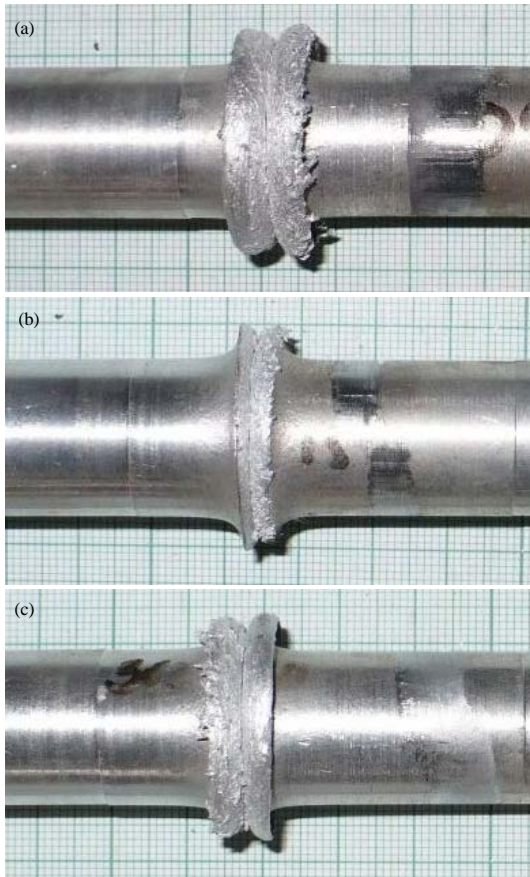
Representative photographs of CDFW joints: a) Chamfer angle of 0° (without chamfer); b) Chamfer angle of 15° and c) Chamfer angle of 30°
